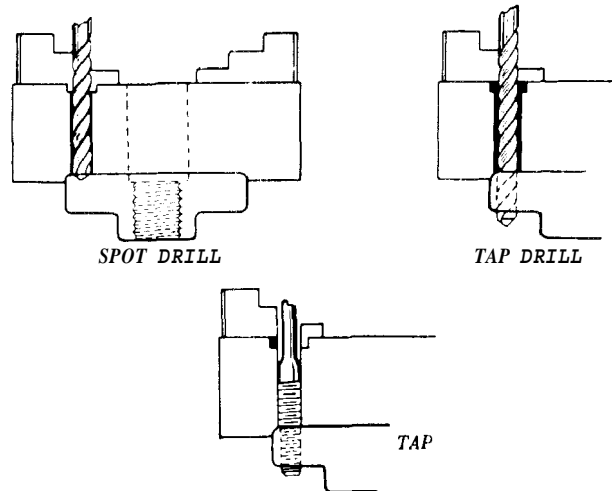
DRILLING CHUCK PLATE USING CHUCK AS JIG.
